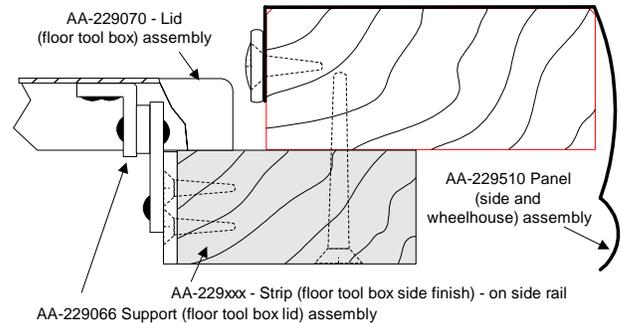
Floor Tool Box Back Wall (“B” Style)
